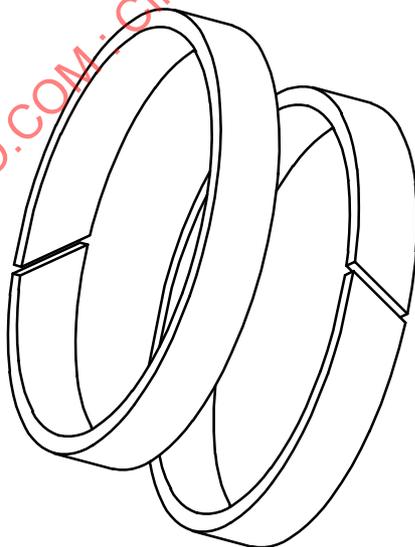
Typical example of a rectangular-cut-section bearing ring
